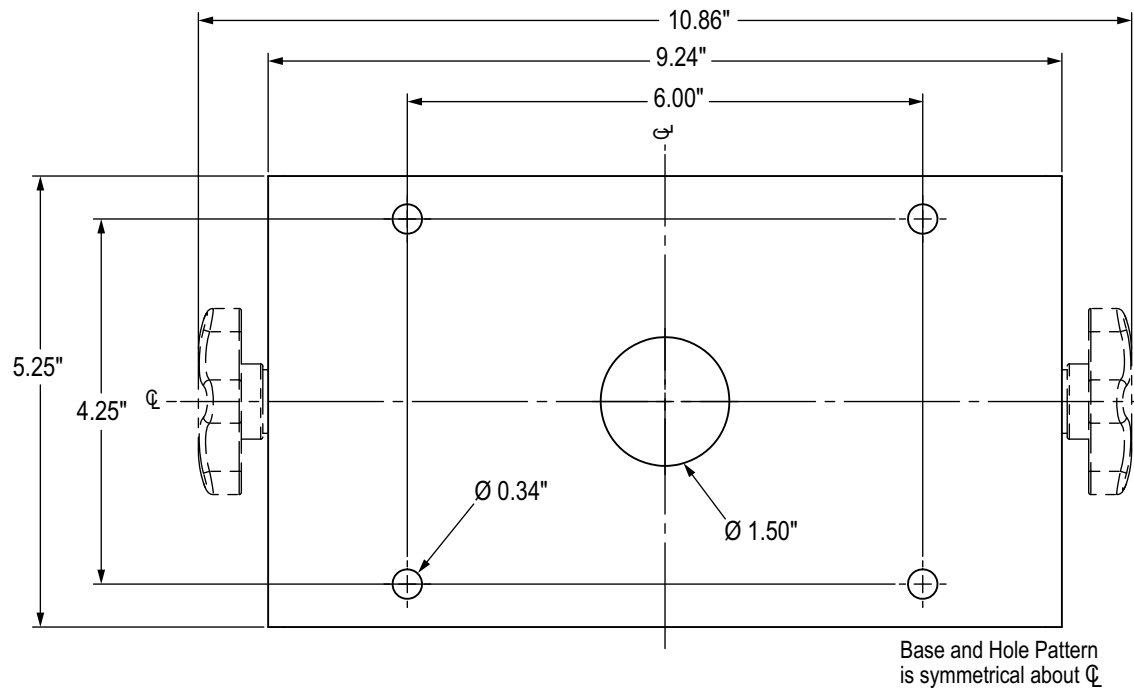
Universal Tilt Stand Hole Pattern Dimensions
